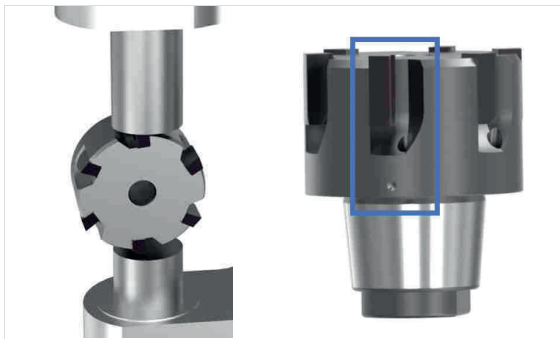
Reference cutting edges for measuring and setting the tool diameter
